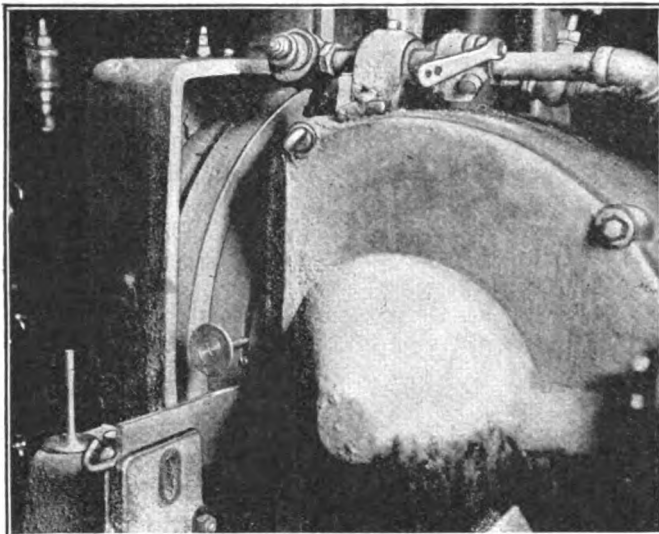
MACHINE SET FOR GRINDING VALVE STEMS
